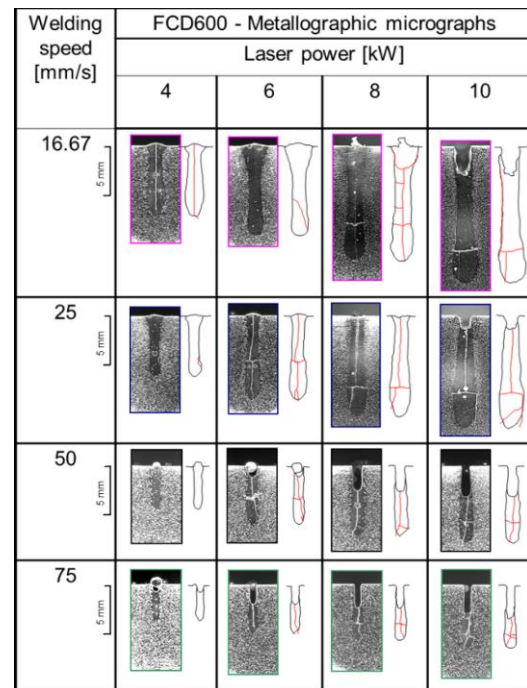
Cross sections of FCD600, BOP welds
